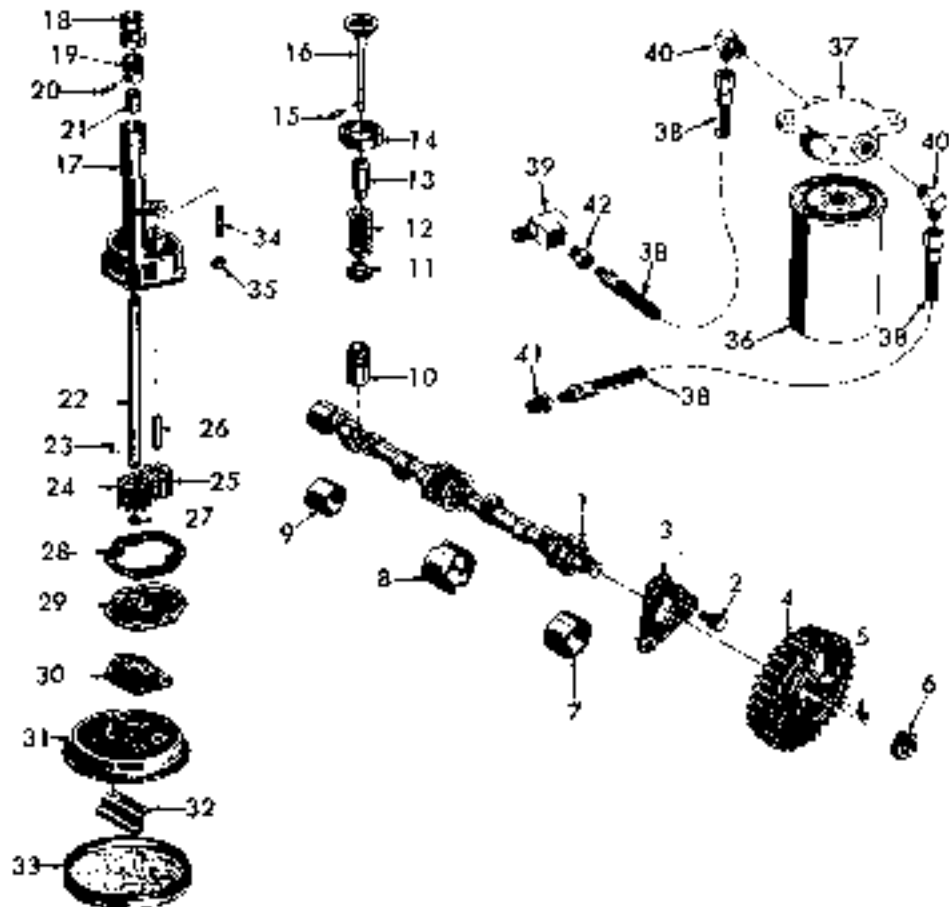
CAMSHAFT, VALVES AND OIL PUMP
